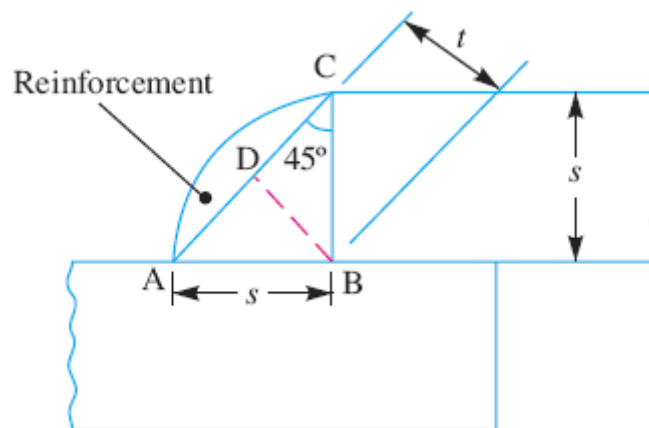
5). Enlarged view of a fillet weld.
